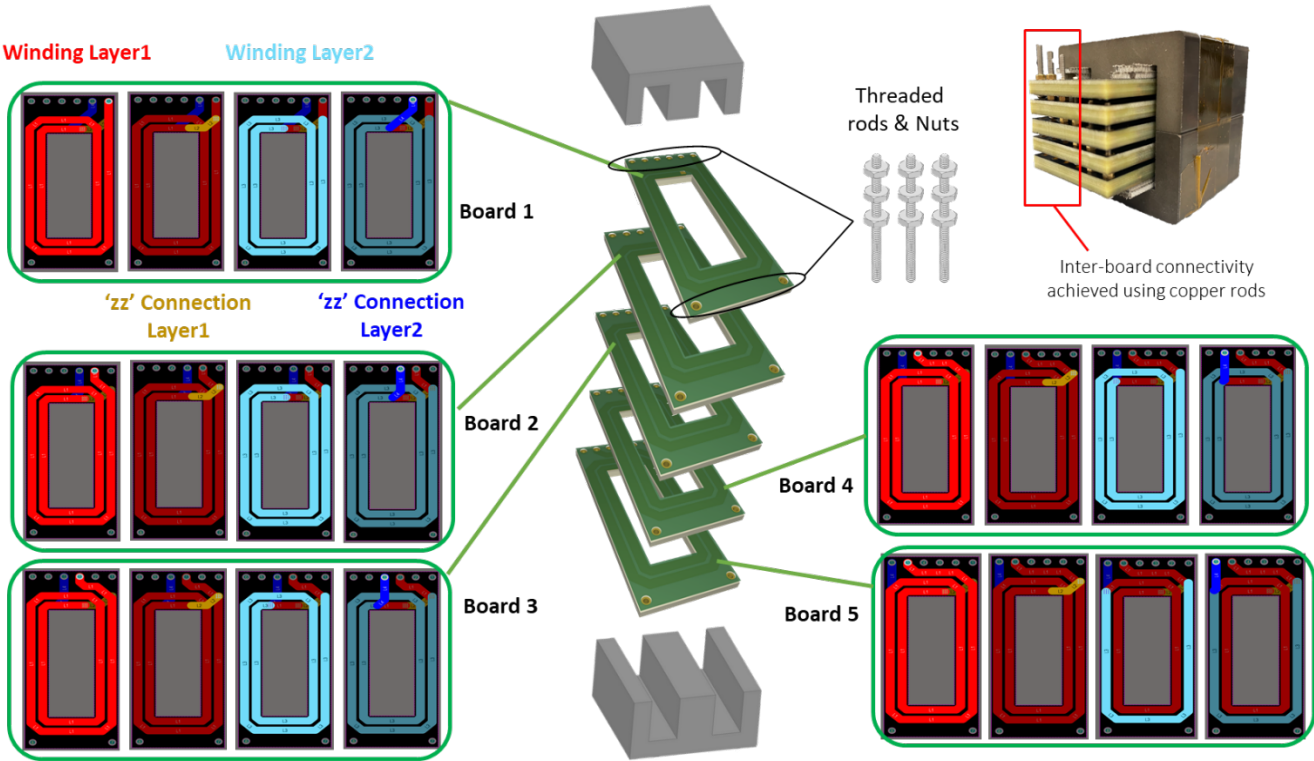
Proposed two-layered zig-zag winding configuration using planar PCB
